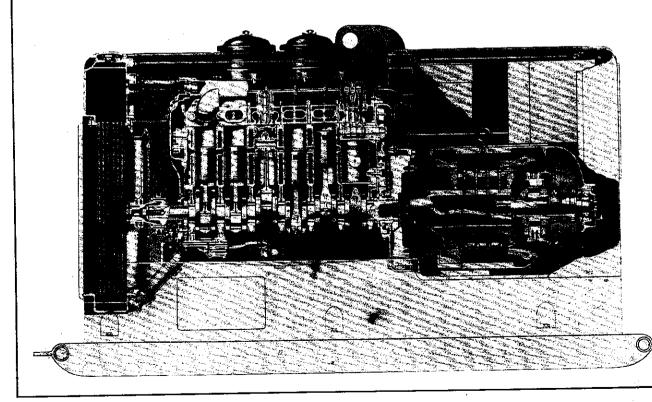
(Above) Six-Cylinder Portable Diesel Generator Set. Side Panels Removed.
